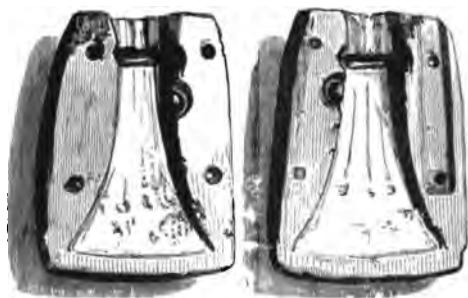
Stone Mould for socketed Axe-heads of Bronze (6 inches in length).
